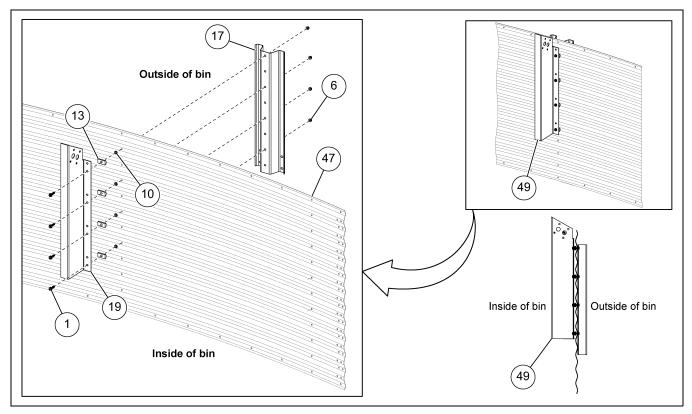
C Installing the Roof Rafter Bracket to the Top Outside Stiffener (40-Series Stiffened Bins) - 4.00"
